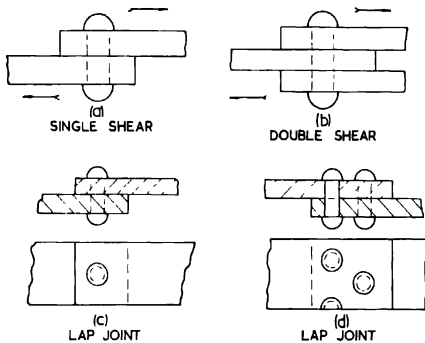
Examples of (a), single shear; (b), double shear; (c), single-rivet lap joint; and (d), double-rivet lap joint.
